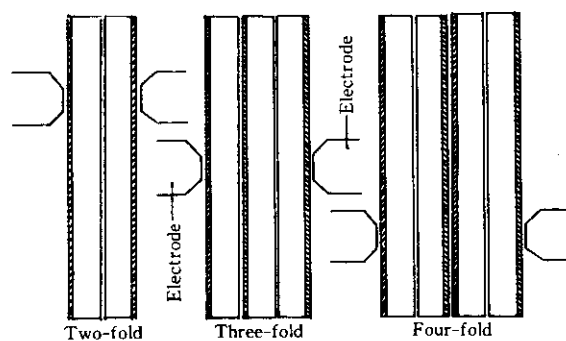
Setting of specimens for resistance spot welding test of WELCOLOR-P (thickness; 0.4 mm)
